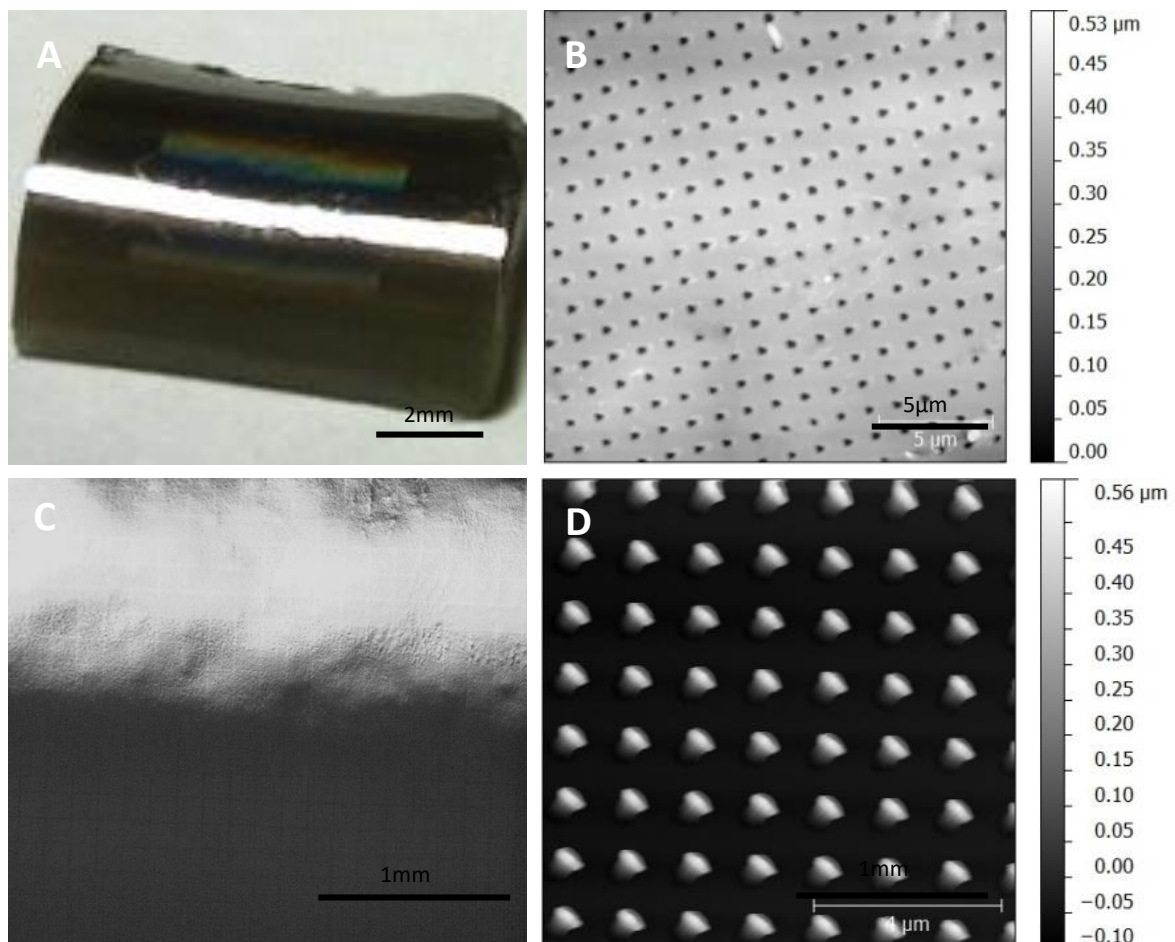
A) Optical image of a half cylinder cut from a PCL rod which had its circumference imprinted by a flexible FEP stamp at 80°C. B) AFM scan of imprinted cylinder surface showing the nanopits formed on the cylinder surface. C) Optical CMM image of cylinder surface, showing the 200 µm gaps in the nanopatterned array on the cylinder surface. D) AFM of the FEP replica stamp used, same as that used for evaporation of Ti mastering process. Scale bars: A) 2 mm, B) 5 µm, C) 1 mm, D) 4 µm.
